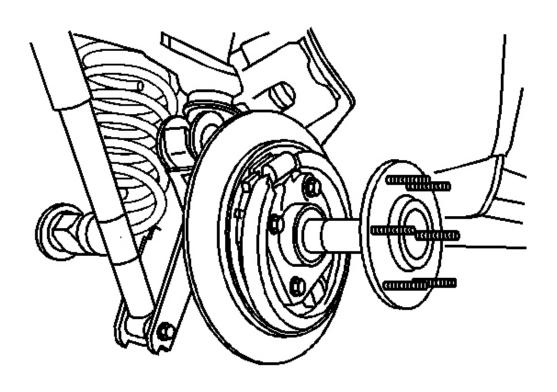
View Of Rear Axle Assembly Courtesy of GENERAL MOTORS CORP.
